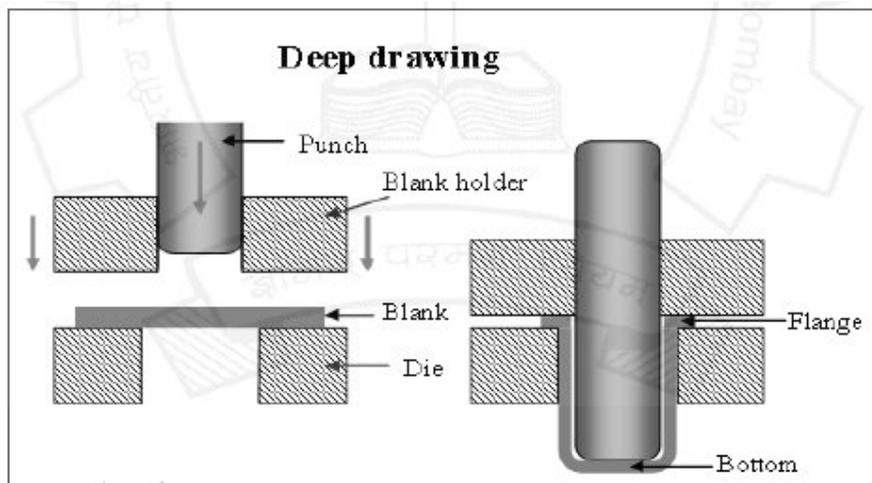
Schematic outline of Deep Drawing Process [3]
